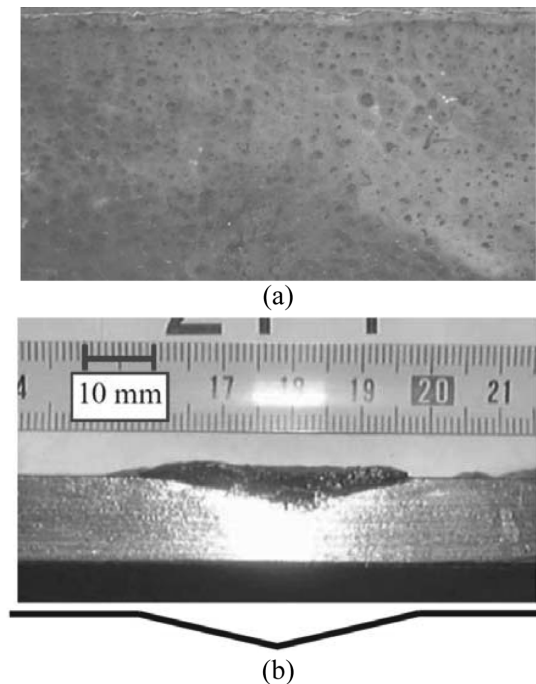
Pitted web plate of the hold frame of a bulk carrier [1]: (a) Pitted surface; (b) Cross-sectional view
